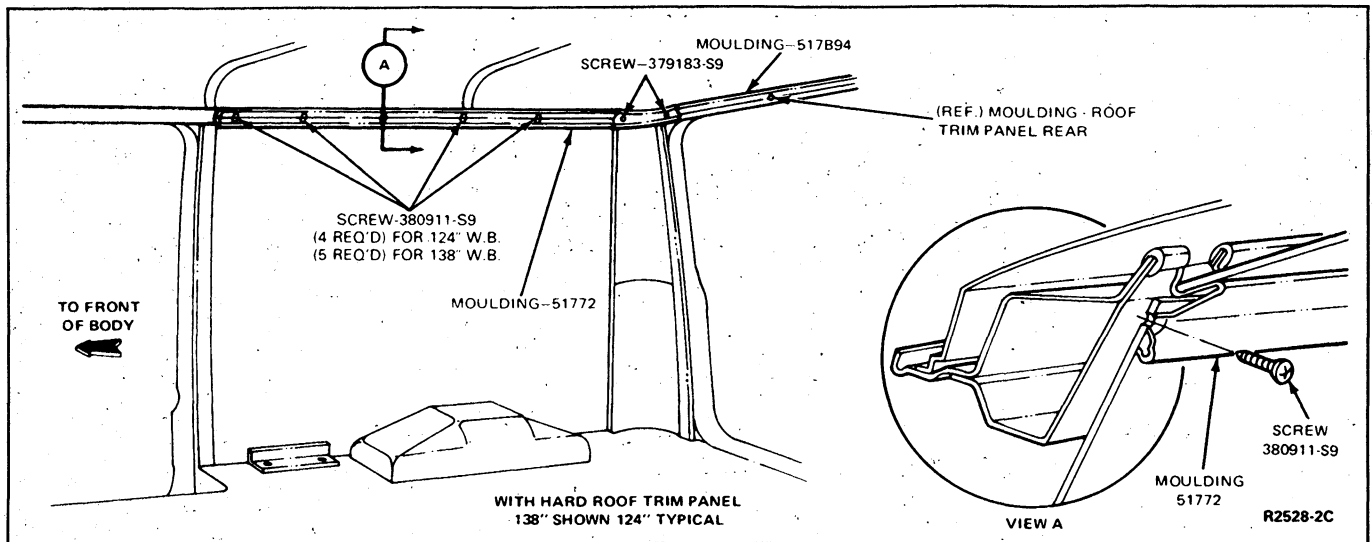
Interior Roof Mouldings—E-150—E-350—Hard Roof Trim Panels
